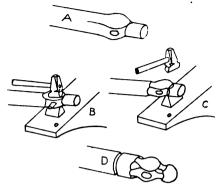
SHOWING THE STEPS IN FORGING HAMMER
